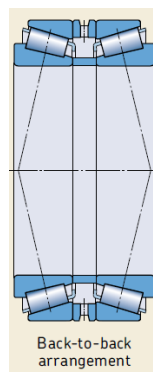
Tapered roller bearings back-to-back arrangement (also designated as “O” arrangement) [36]
